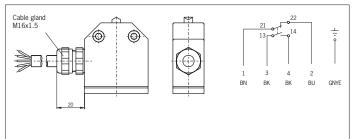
Dimension drawing/connection diagram for SN01.558X... with connecting cable (PUR cable, 5x0.5 mm²)
